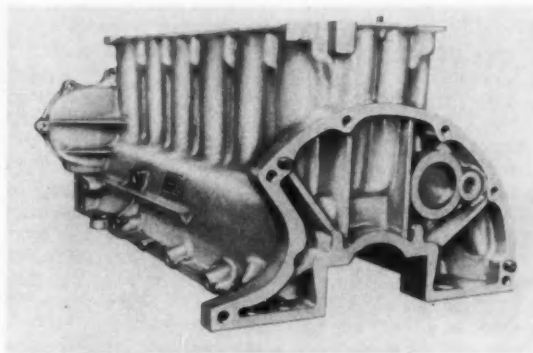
Rear face view of Chrysler die-cast aluminum cylinder block.
